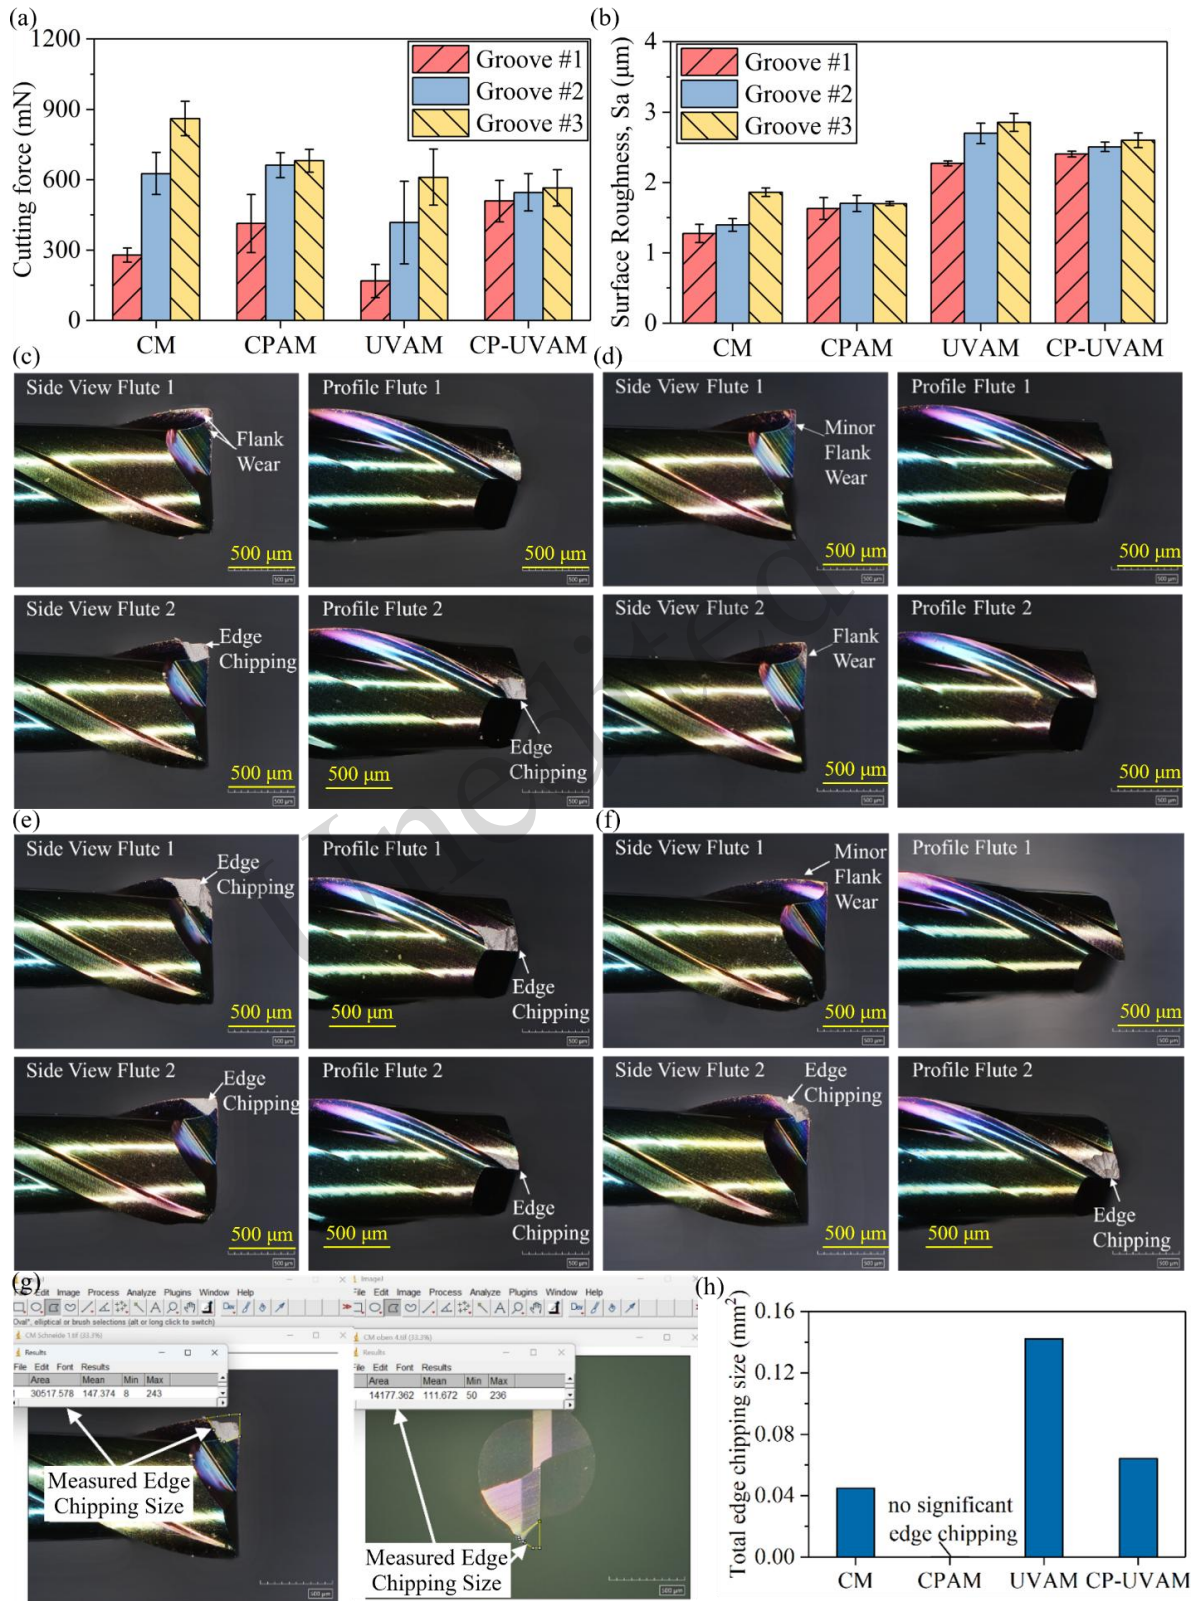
Micro-milling performance of BMGs under various milling strategies. (a) Average cutting force of grooves machined by different milling methods; (b) Surface roughness of grooves machined by different milling methods; (c) Tool wear of CM; (d) Tool wear of CPAM; (e) Tool wear of UVAM; (f) Tool wear of CP-UVAM; (g) Exemplary measured edge chipping size of a flute from side and end views using ImageJ; (h) Total tool edge chipping size by different milling
